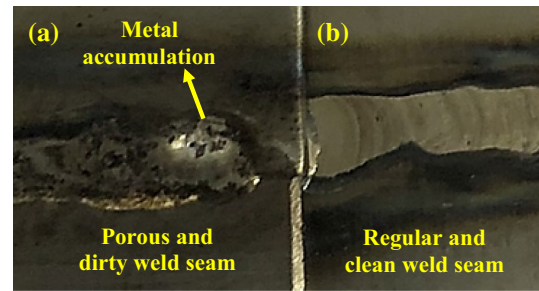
a Manuel and b automatic welding seam macrographs
